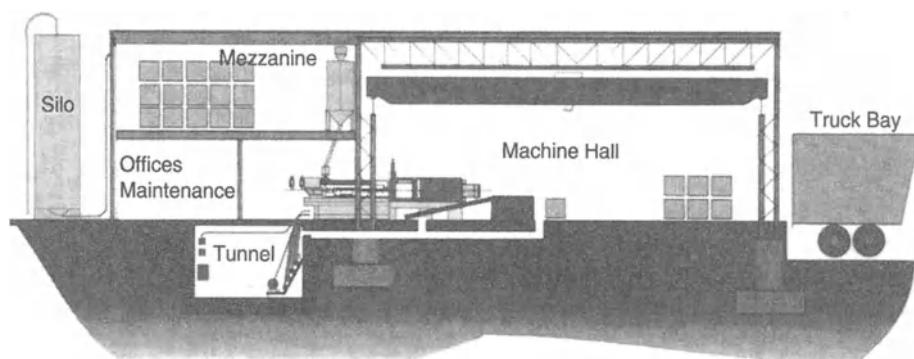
Example from Husky of a molding room elevation drawing showing the arrangement of support devices.
